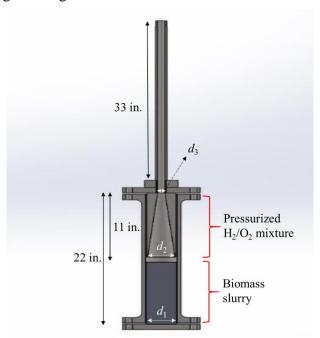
Cross-sectional view of 2-L shock tube and its dimensions.
